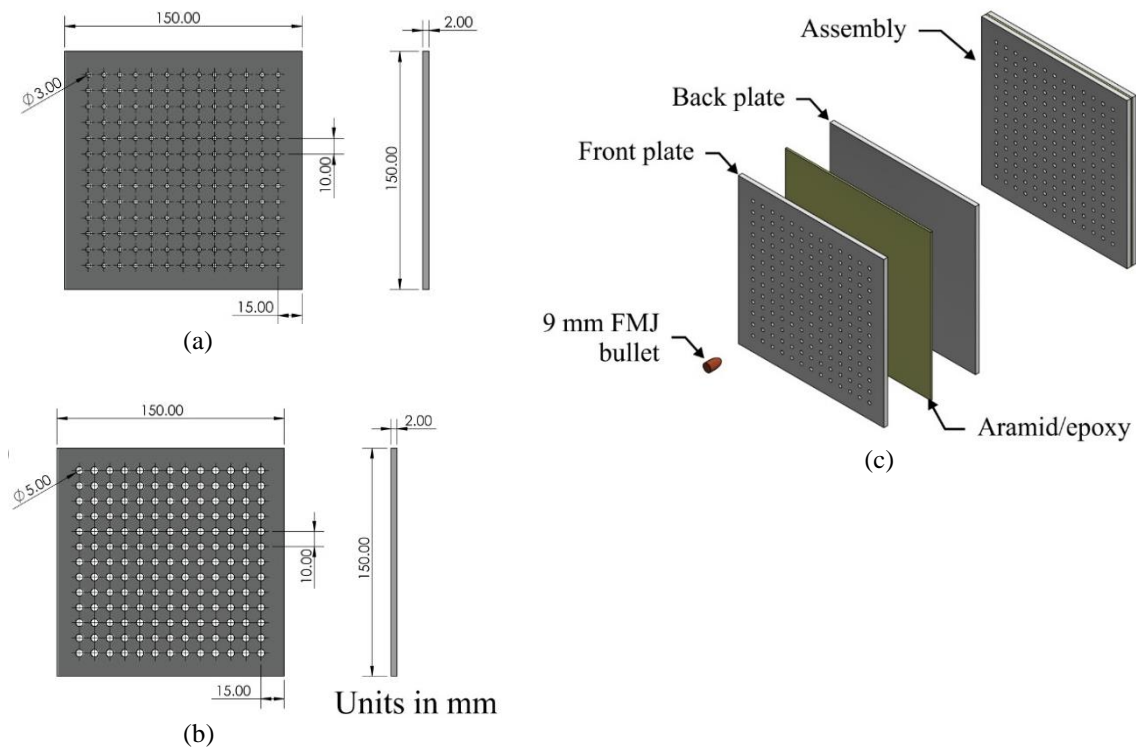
Dimensions and hole patterns: (a) 3 mm hole; (b) 5 mm hole; (c) fabricated FMLs with a hole
